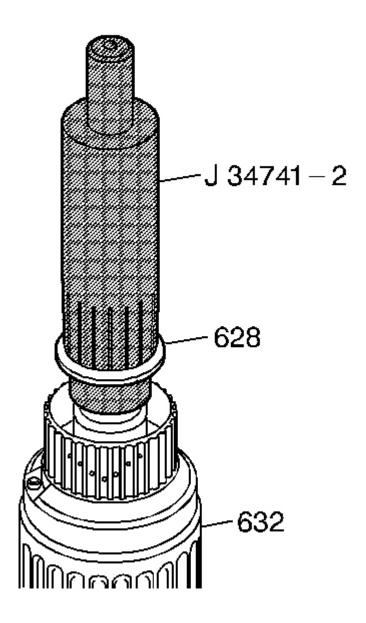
Using J 34741-2 & J 34741-1 To Install Seal Rings Courtesy of GENERAL MOTORS CORP.
